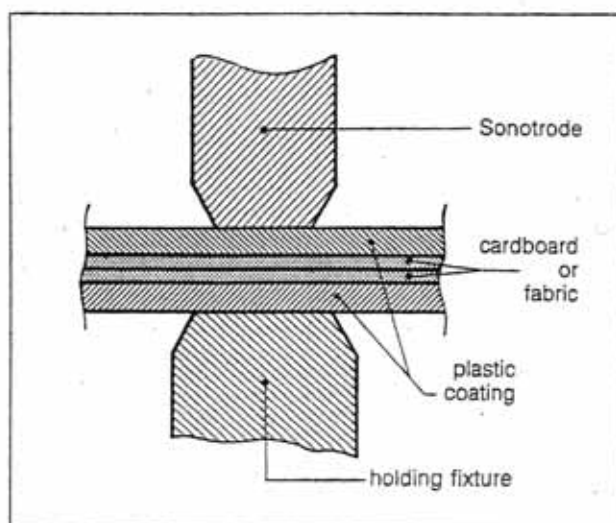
Arrangement in ultrasonic welding of coated cardboards or fabrics
